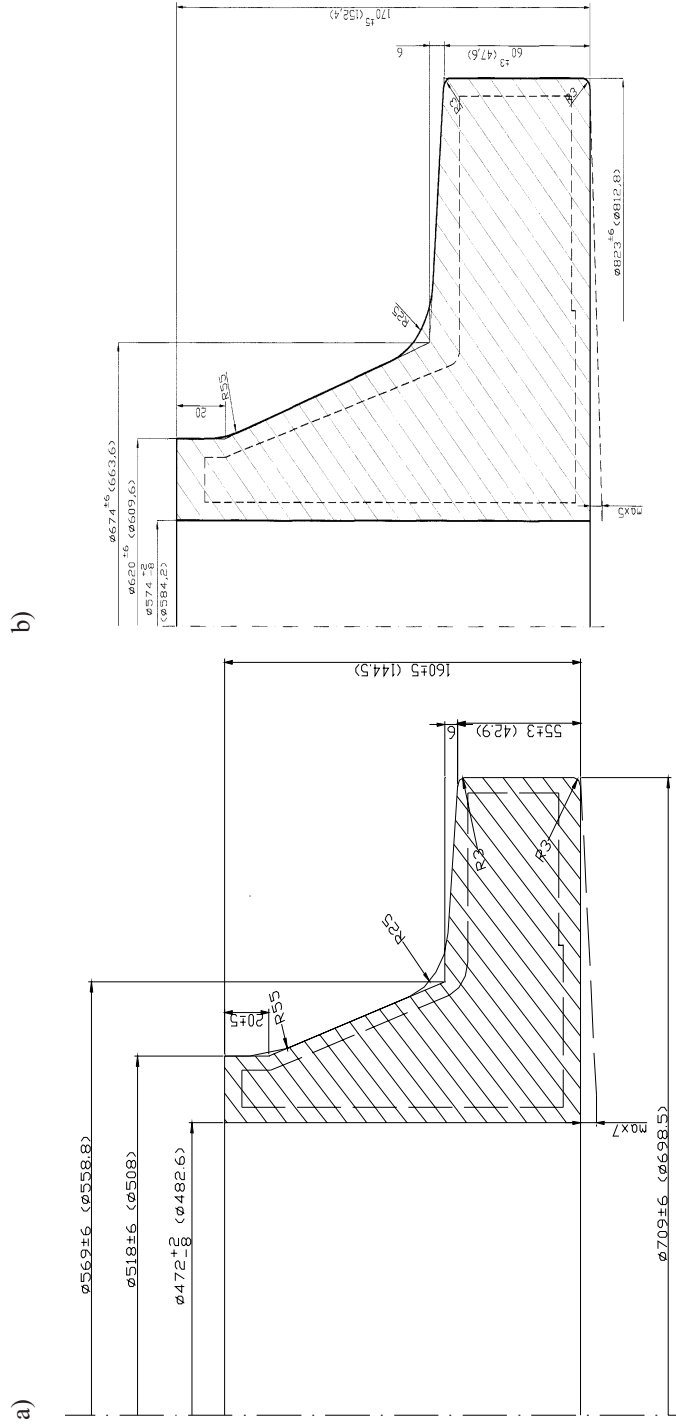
Shape and dimensions of welding neck type ring: a) welding neck 20"; b) welding neck 24"
